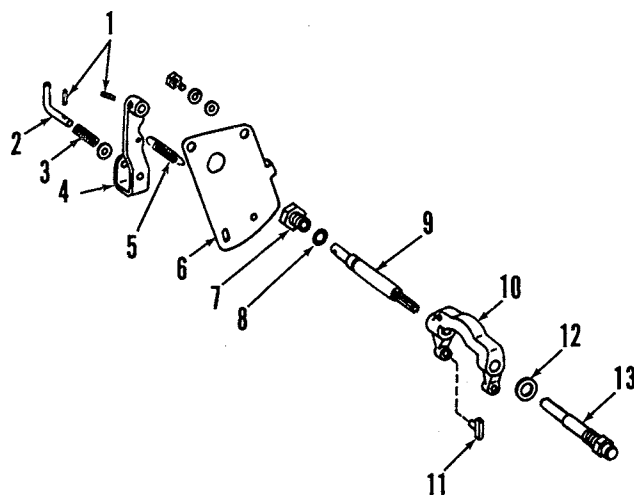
Exploded view of tow disconnect shifter mechanism used on Model 4050. Other models are similar.
